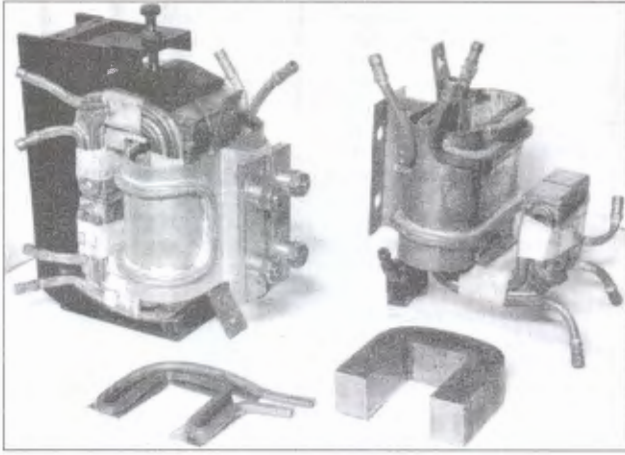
Low-power high-frequency welding transformer of the P-139 type
